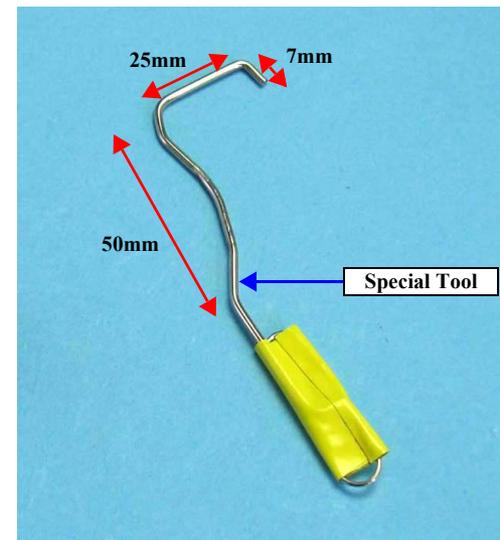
Method for making CSIC Board Removal Tool (2)
